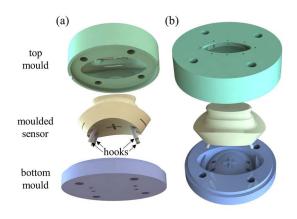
Mould assembly used to encapsulate the strain gauge and the hooks. (a) Bottom view. (b) Top view.
